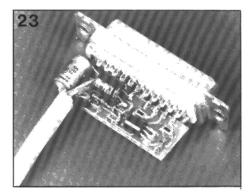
Prototype of the adaptor circuit; it is built mainly in surface-mount technology.
